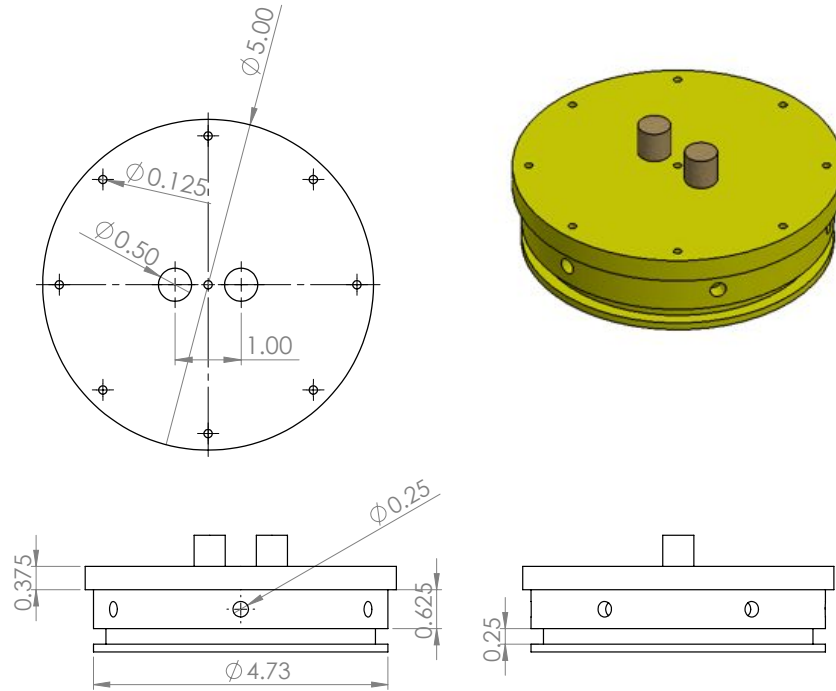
Basic cap design for the SABRE enclosures. The cap will fit into the rounded section of the enclosure in Figure 4.23 with an o-ring shaft seal. Feedthroughs for gas and electrical cables (shown in beige) are arrayed on the top of the cap. The support structure for the crystal and PMTs screws into the bottom of the cap.
